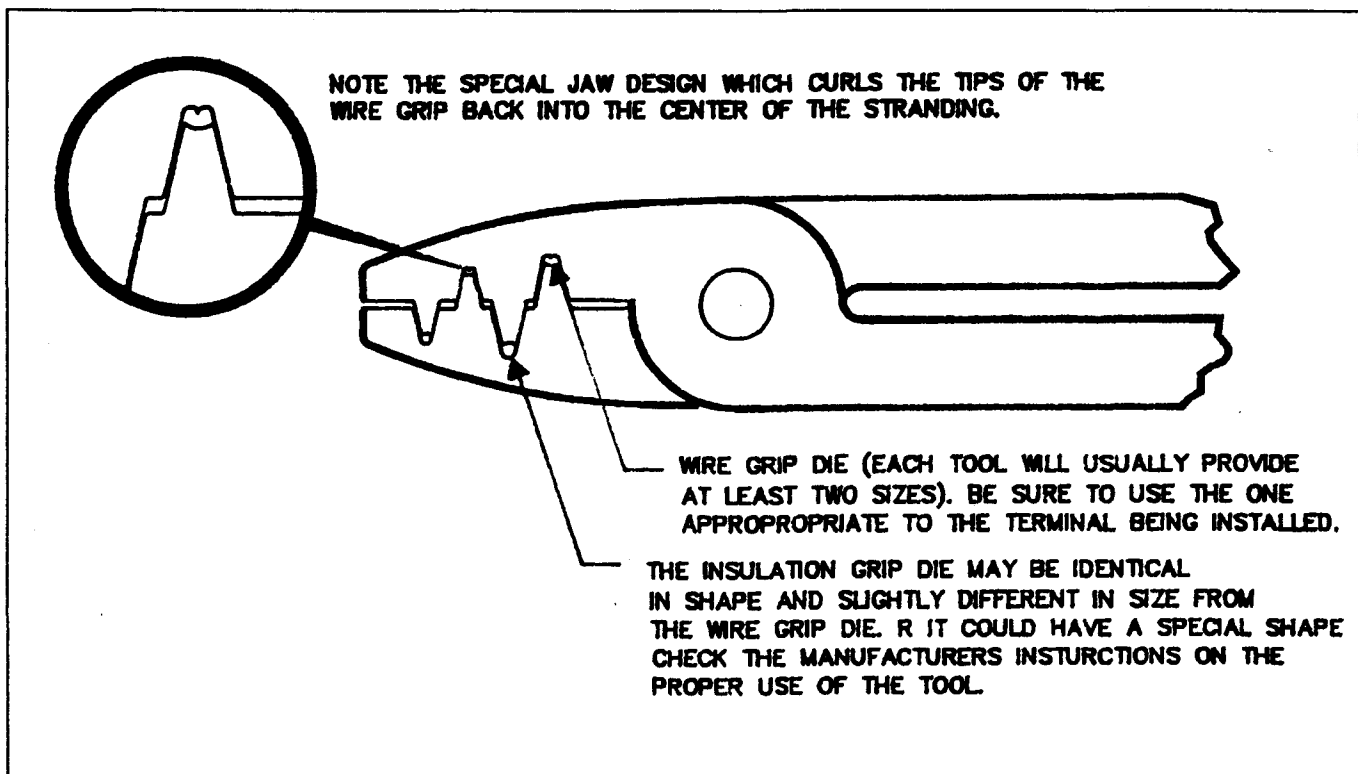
Tooling for Sheet Formed Pin and Socket Connectors.
